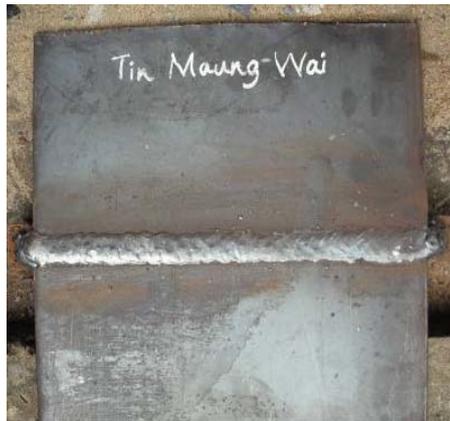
Good Example of Flat Position Butt Welding Bead
